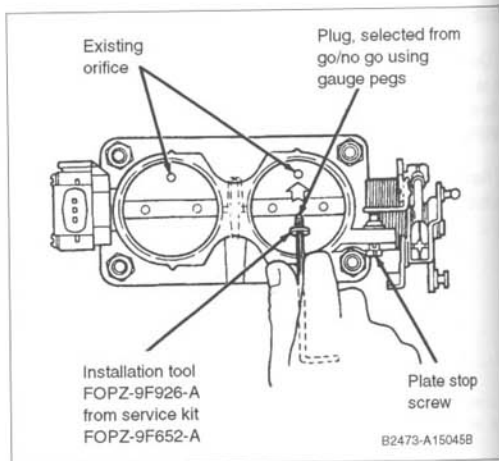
If necessary, install plug in throttle plate orifice (Dual throttle plates shown.) Notice plate stop screw.
